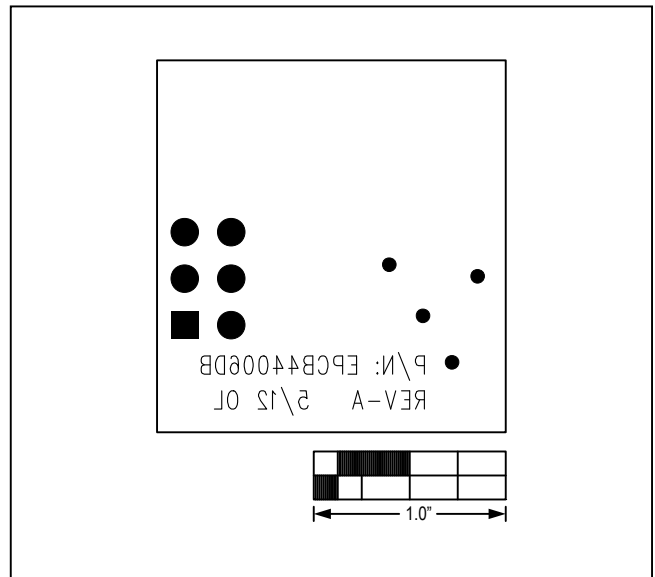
MAX44006 Daughter Board Component Placement Guide—Bottom Side
